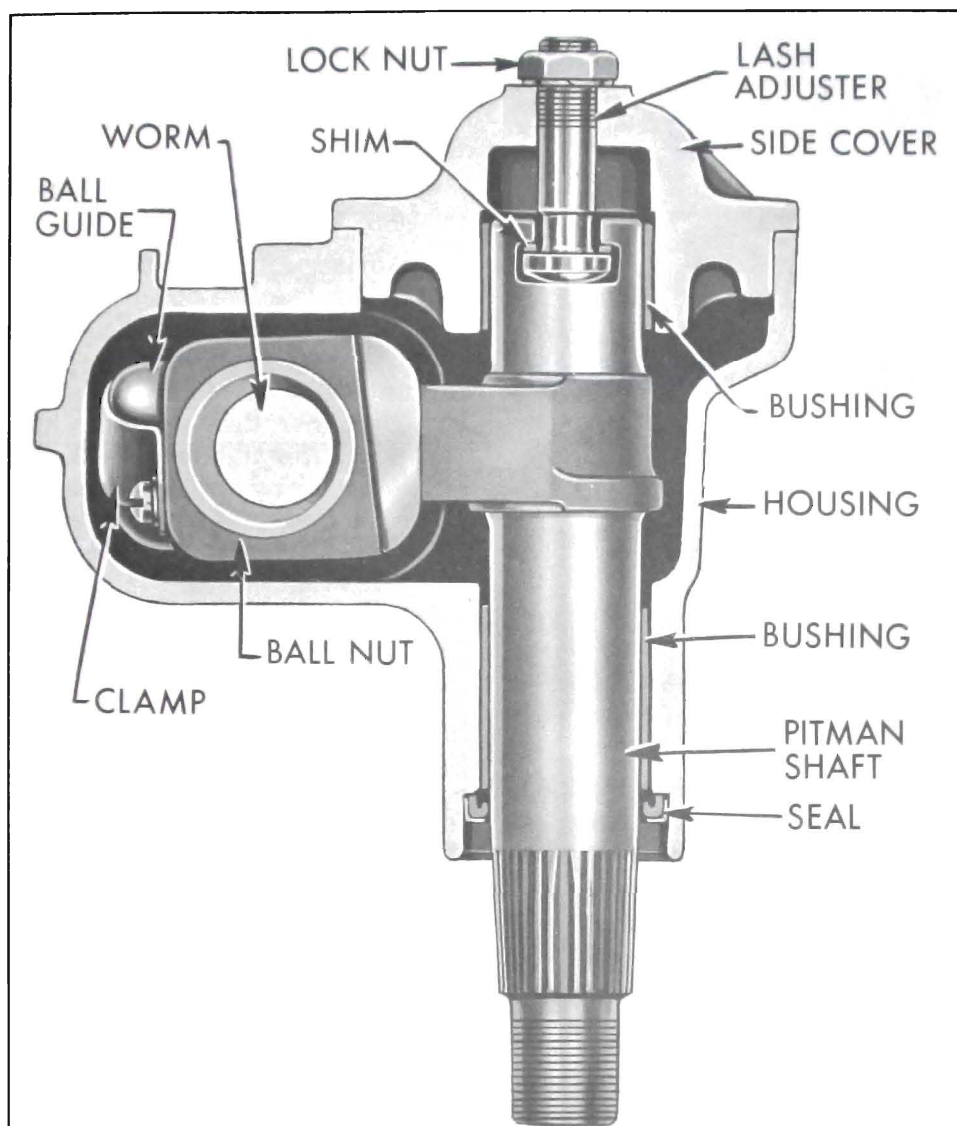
Steering Gear Pitman Shaft and Ball Nut
